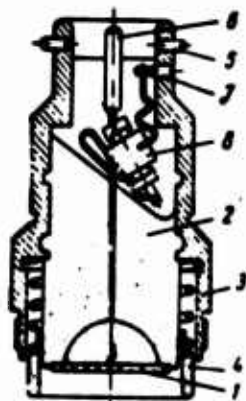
Diagram of combined searching head: 1 - piezoelement; 2 - damper; 3 - body; 4 - grounding ring; 5 - pressure pin; 6 - contact pin; 7 - grounding contact; 8 - inductance coil.
